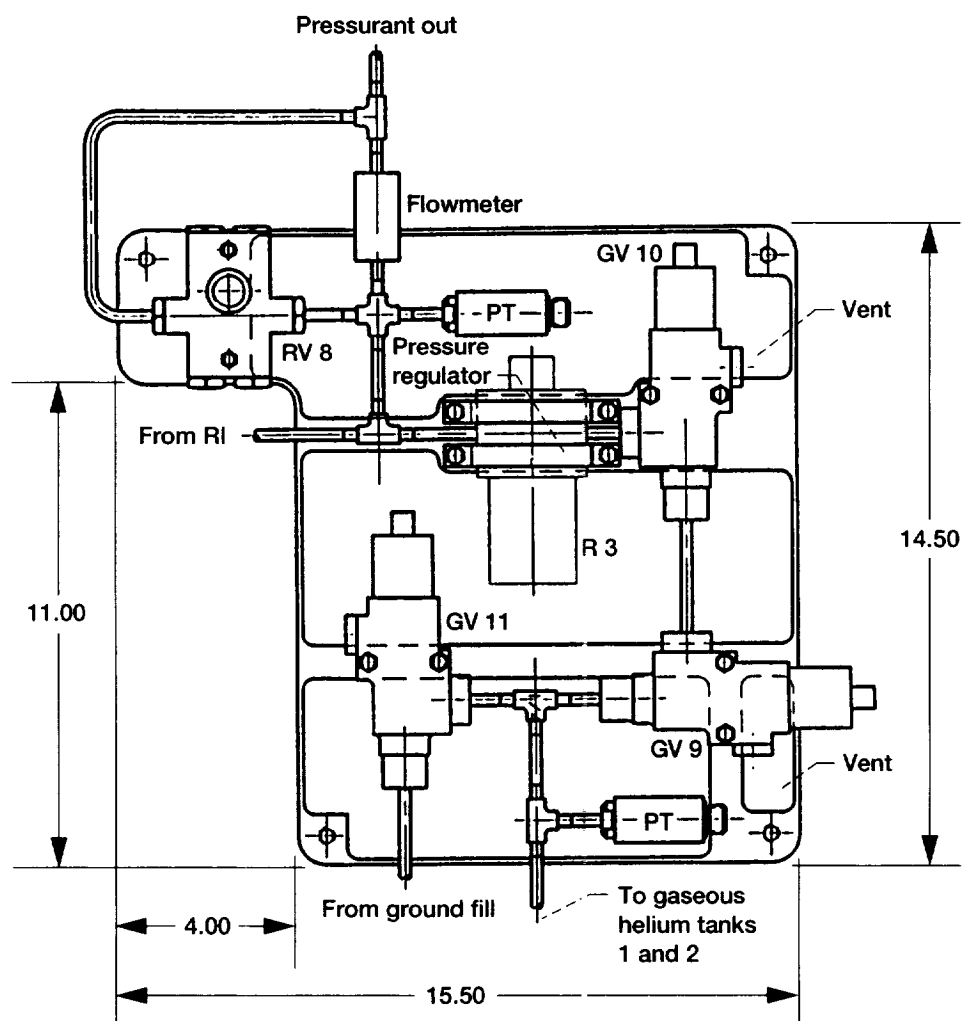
Valve panel "D" (helium bottles). Dimensions are in inches.
